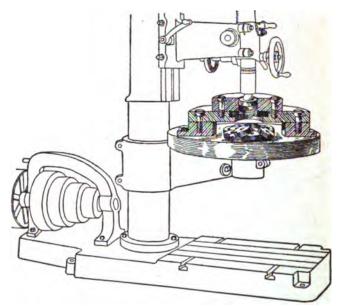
THREADING PLUGS ON THE DRILLING MACHINE WITHOUT REVERSING THE SPINDLE
